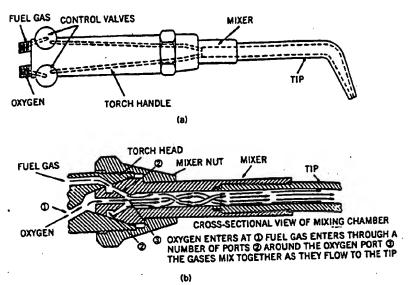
Schematic of the basic elements of an oxyfuel gas welding torch (a) and the detail design of a typical gas mixer for a positive-pressure type torch (b). (From Joining of Advanced Materials by R. W. Messler, Jr., published in 1993 by and used with permission from Butterworth-Heinemann, Woburn, MA).
